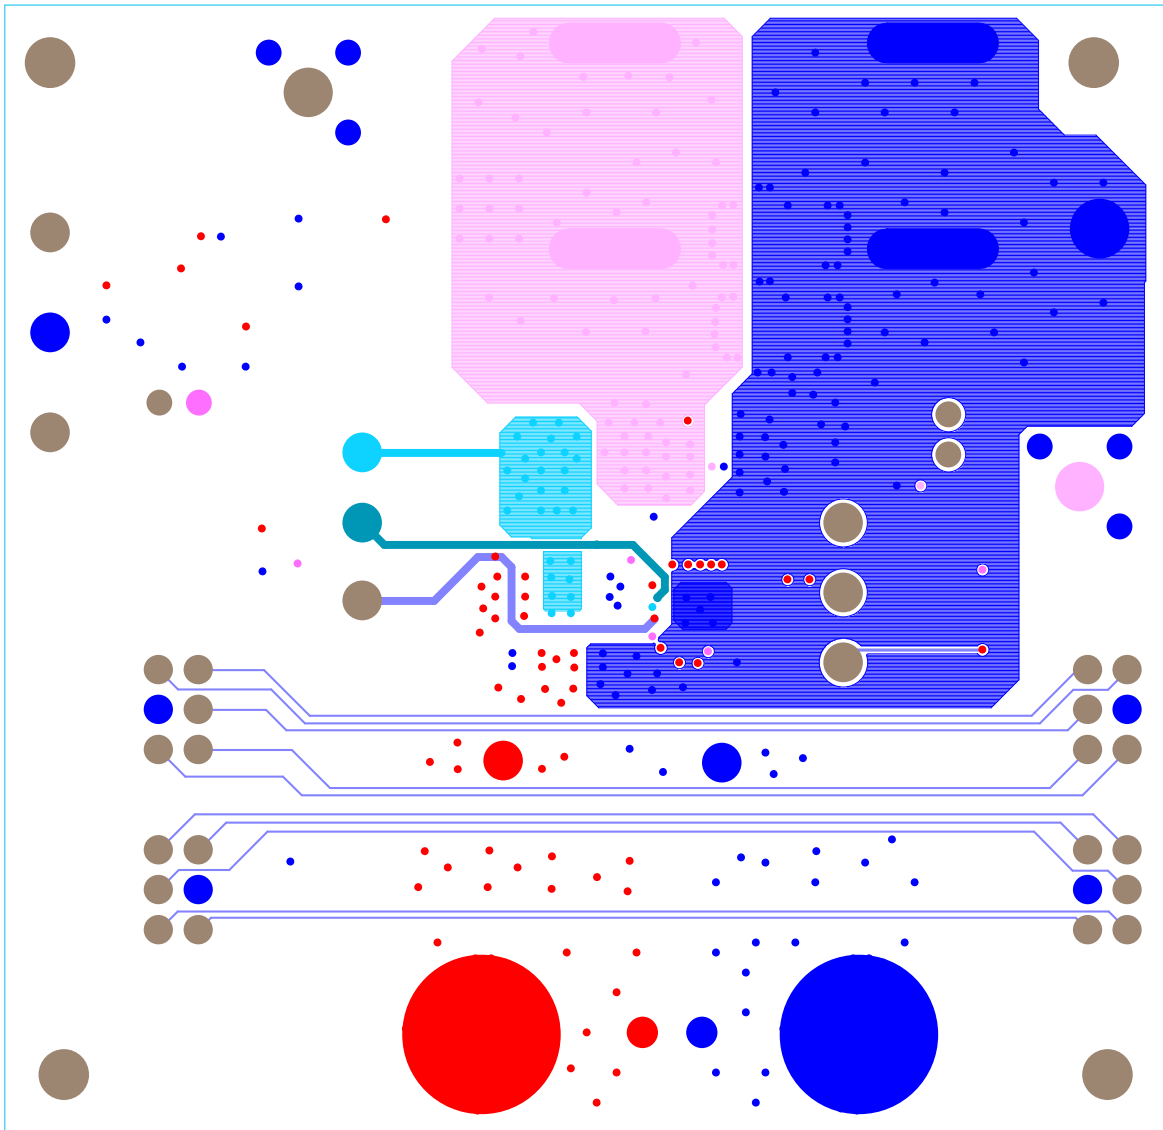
PCB - INNER LAYER 3 (TOP VIEW)
